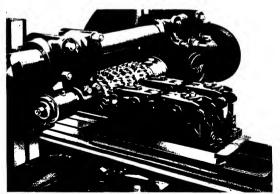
Heavy Attack of a Gang of 8 Facing Cutters Machining  $2\times 4$  Parallel Surfaces of Two Strel Castings Clamped in the Revolving Jig (Fig. 129)
